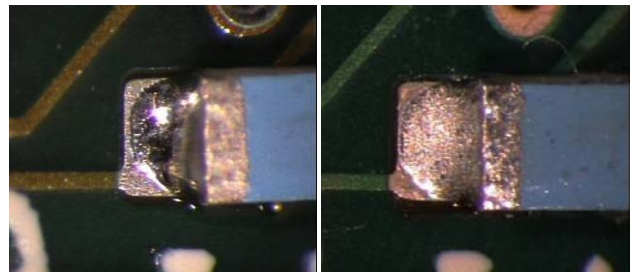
Visual inspection difference between SnPb solder joint (L) and SAC solder joint (R)
